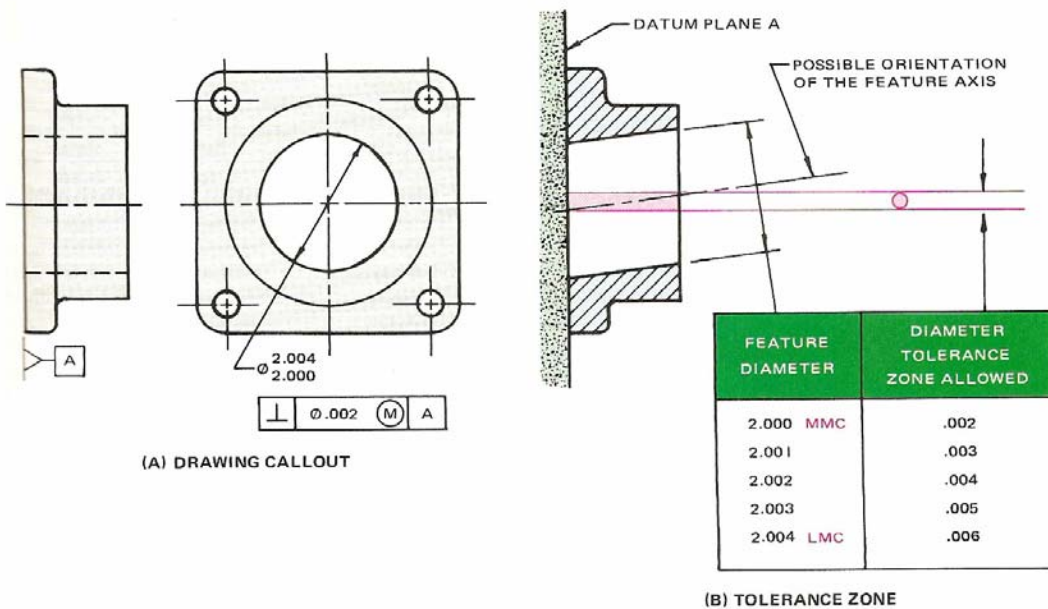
Specifying perpendicularity for an axis (tolerance at MMC).
